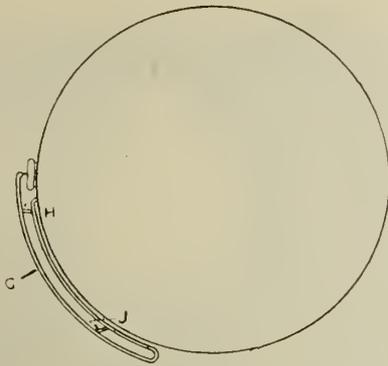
Arrangement of Gas Valve Siphon Pipe.
